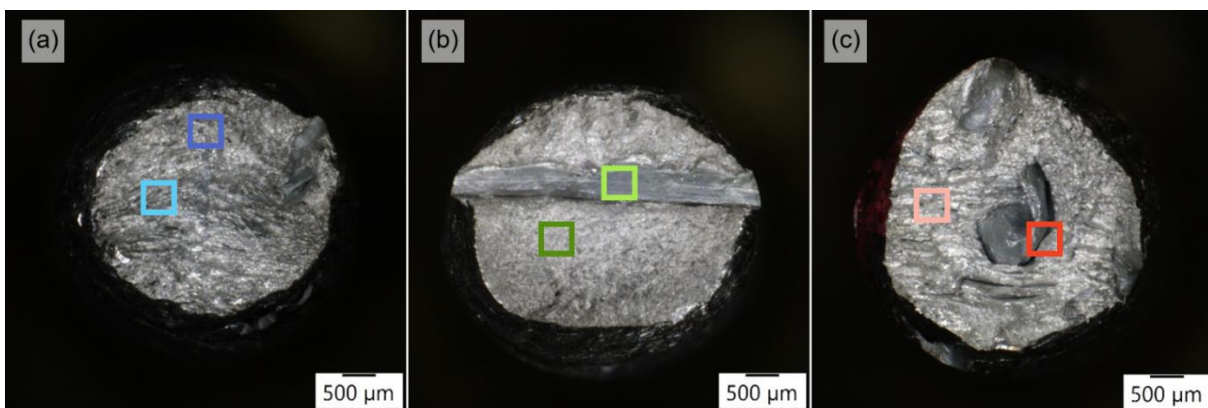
Macroimages of the fracture areas after tensile test of (a) weld A-1, (b) weld C-1 and (c) weld E-1
